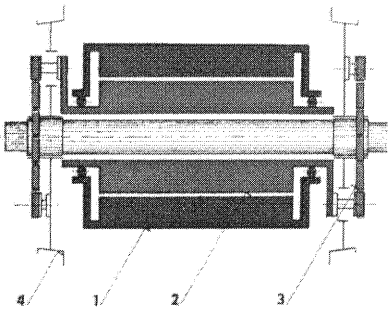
Gearless 85 E0 ATM: 1 – stator, 2 – rotor, 3 – coupling, 4 – driven axle
